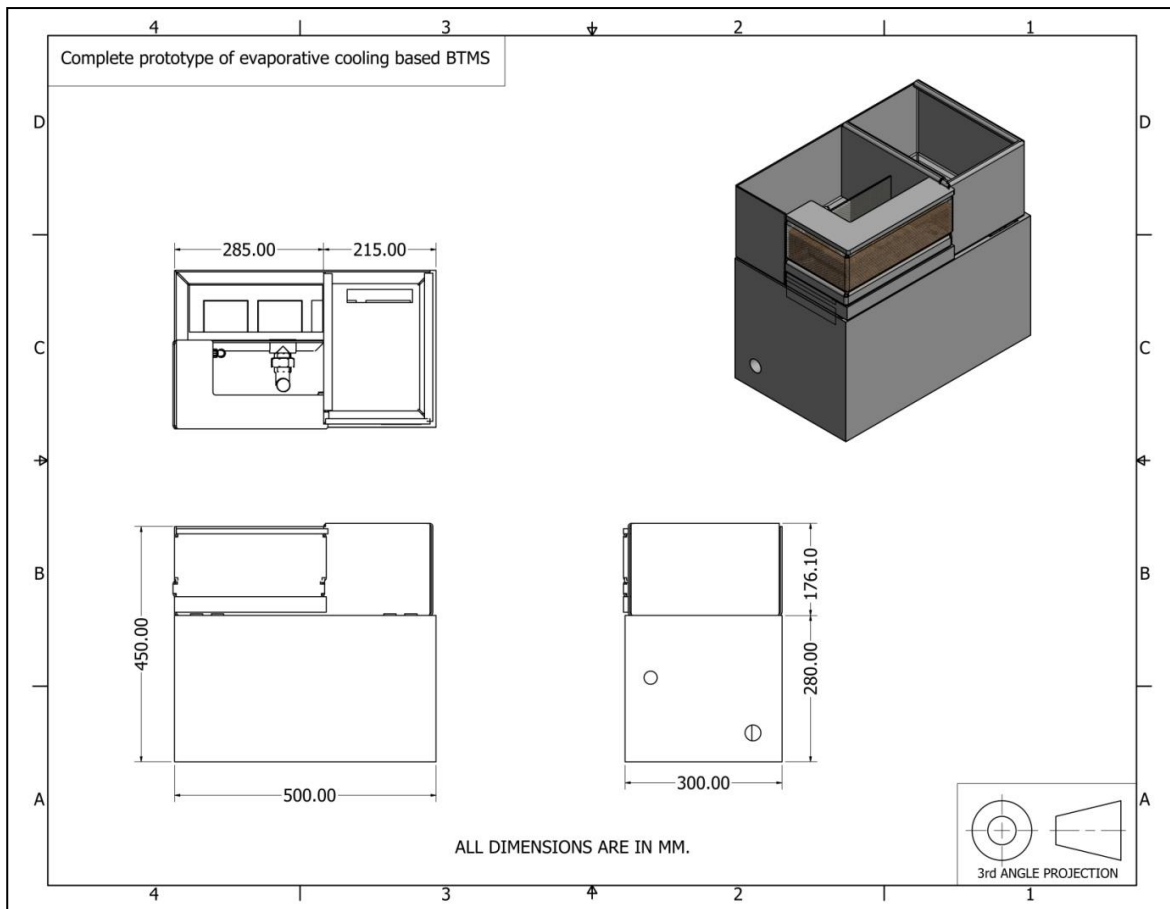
Assembly drawing of complete prototype of evaporative cooling based BTMS
